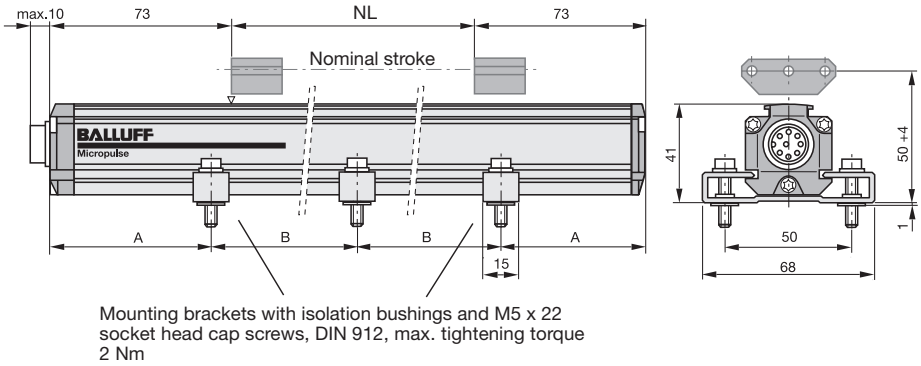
Dimensional drawing (BTL5...P-S 32 transducer with floating magnet BTL5-P-3800-2)
